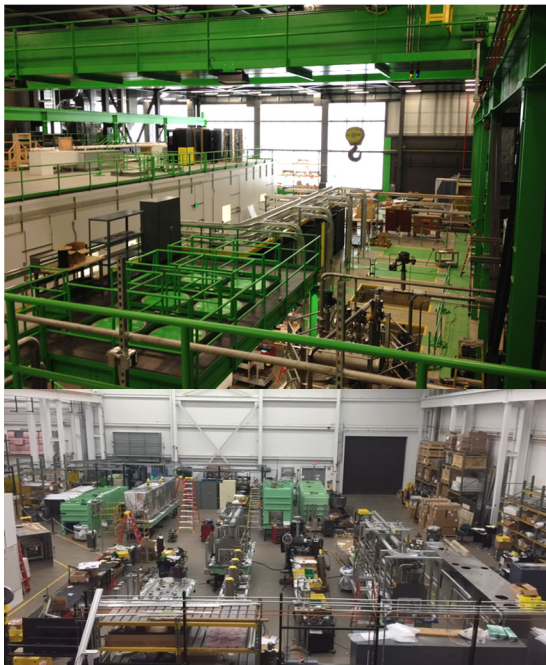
The SRF Highbay (top) and the cryomodule assembly area (bottom) housing six parallel assembly lines delivering more than one cryomodule per month.
